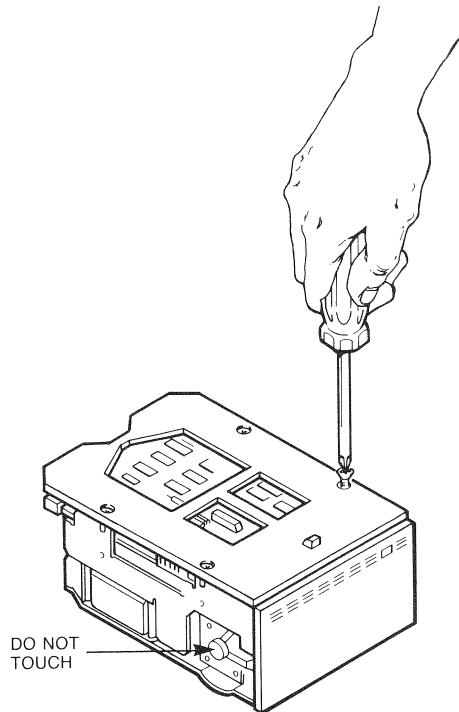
RD51 Disk Drive Skid Plate Removal
